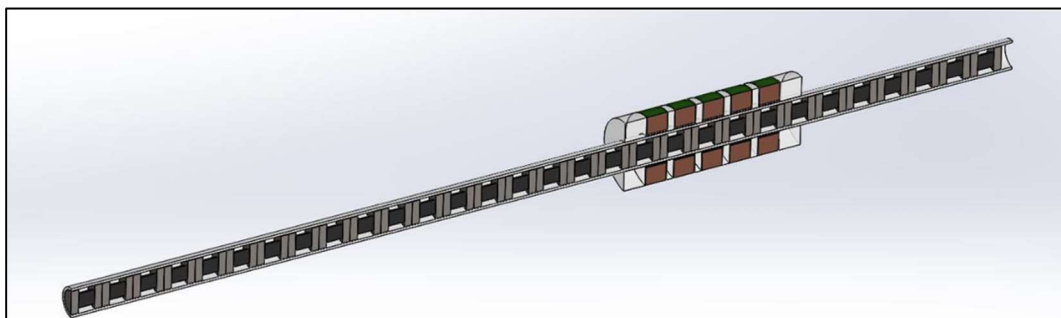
Cross-sectional view of linear generator (credits to the 2016 UNH WECB team)
